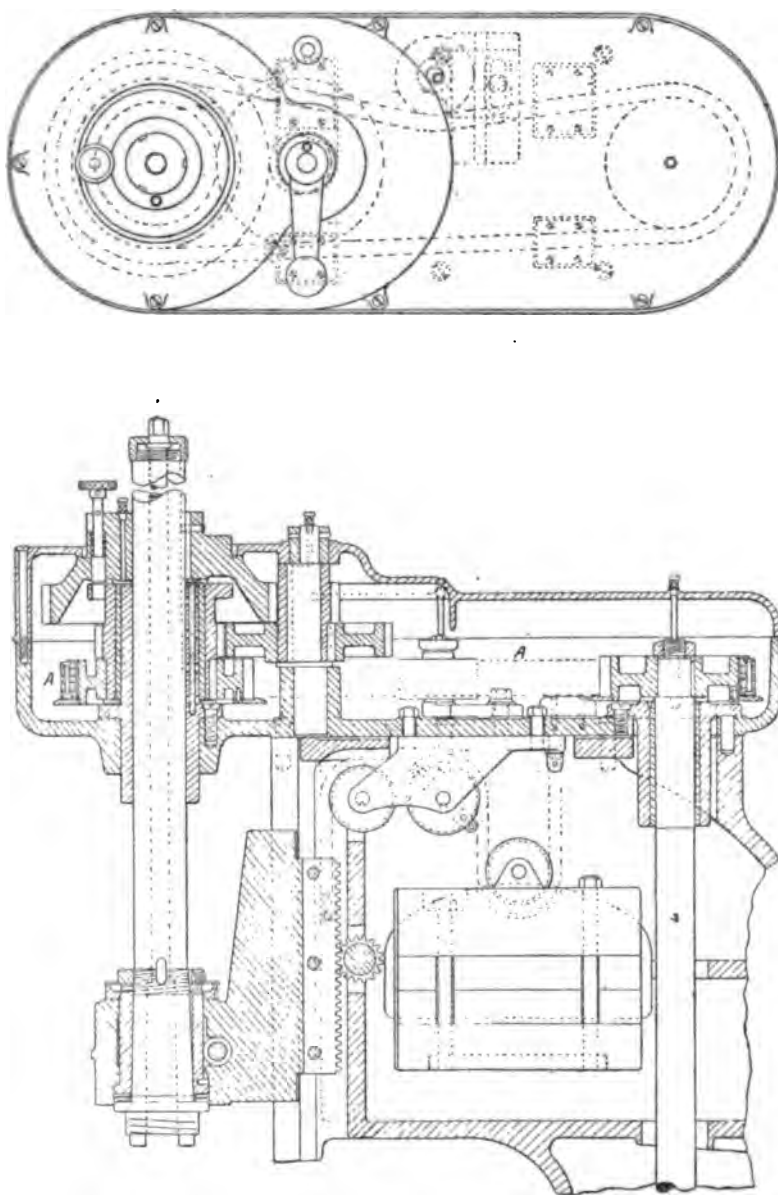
Plan of Head, and Sectional Elevation of Head.
